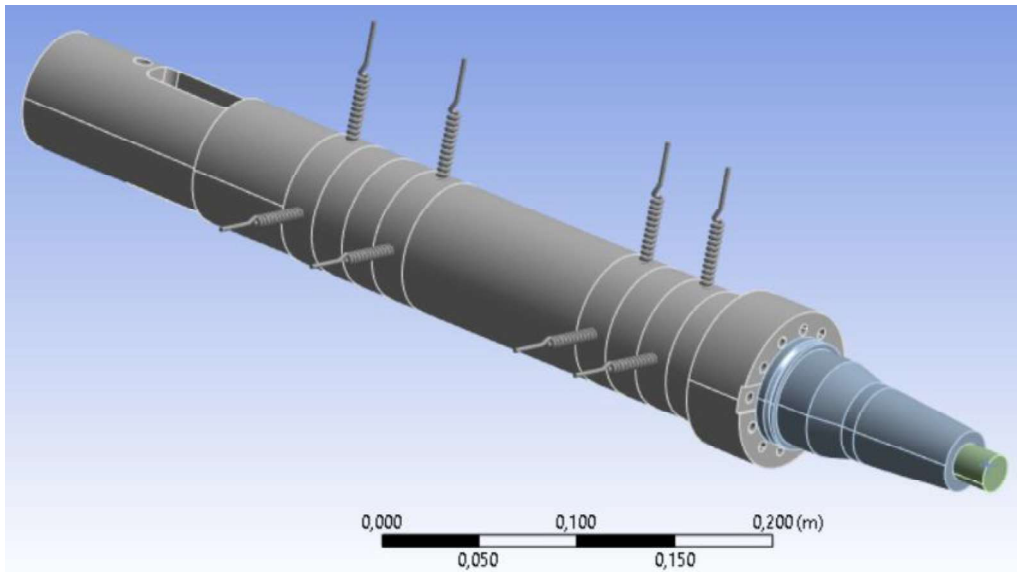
Finite Element Model of Shaft, Tool Holder, and Tool
